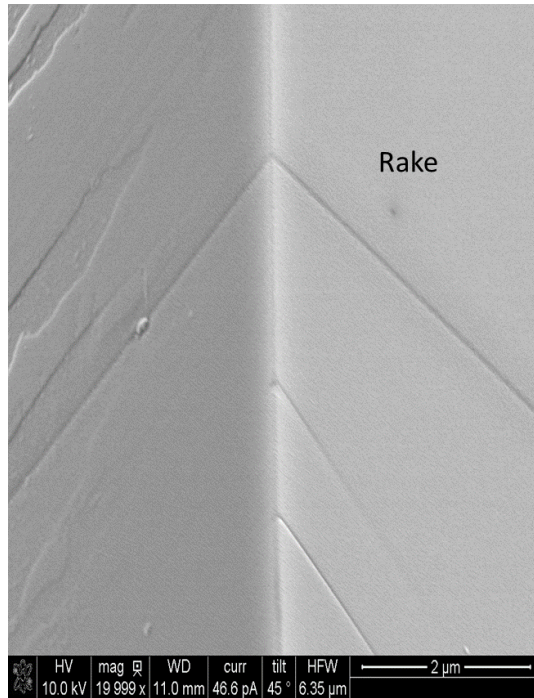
Diamond tool after cutting PMMA for 16 km at 1 m/s.
